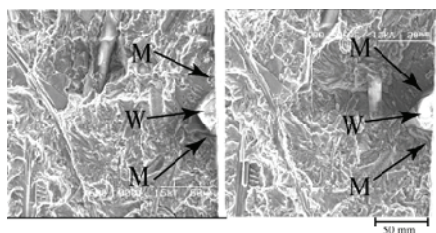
Matching fracture surface after fatigue fracture, $\sigma_{\max} = 156$ MPa, $N_f = 5.73 \times 10^5$.
